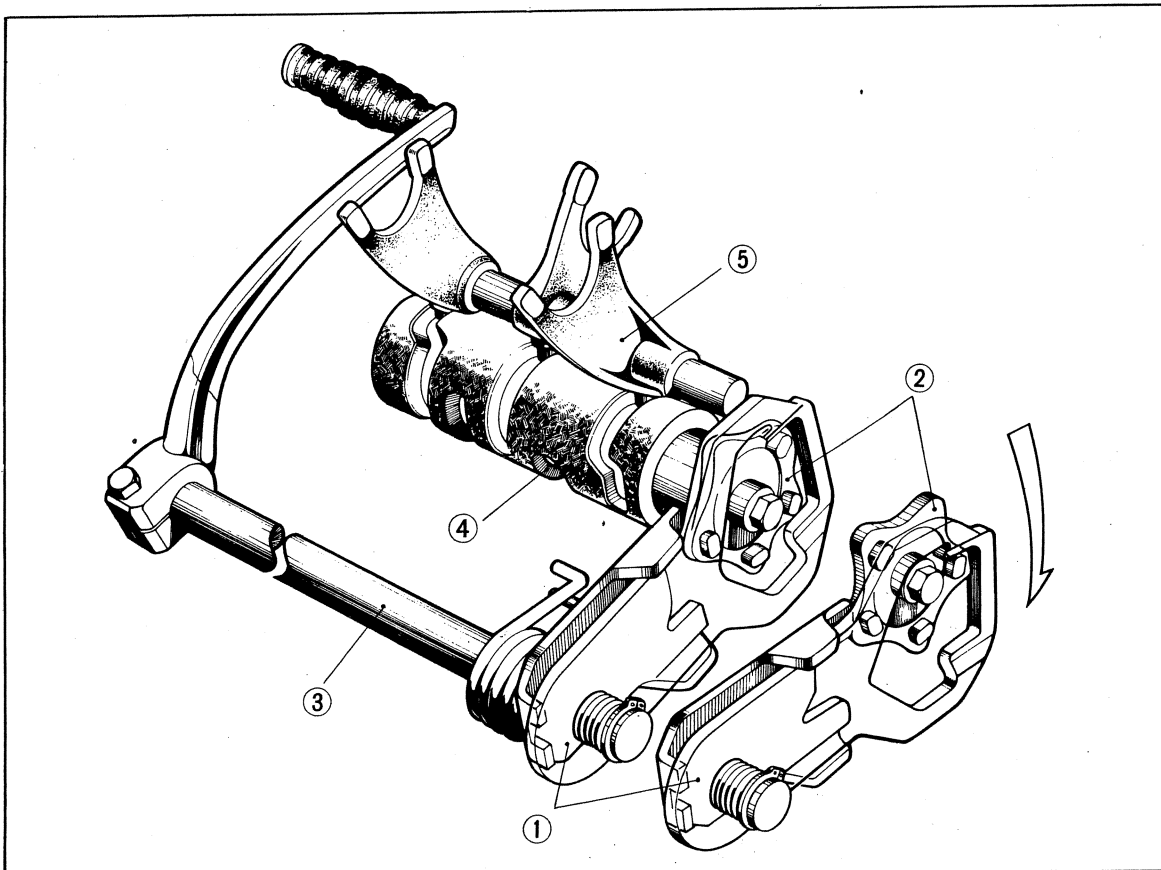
① Gear shift plate ② Gear shift cam ③ Gear shift spindle ④ Gear shift drum ⑤ Gear shift fork
